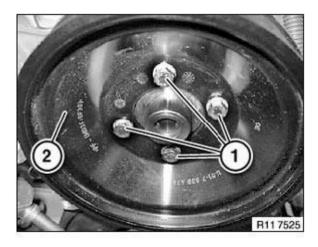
Identifying Alternator Drive Belt Screws And Belt Pulley Courtesy of BMW OF NORTH AMERICA, INC.
